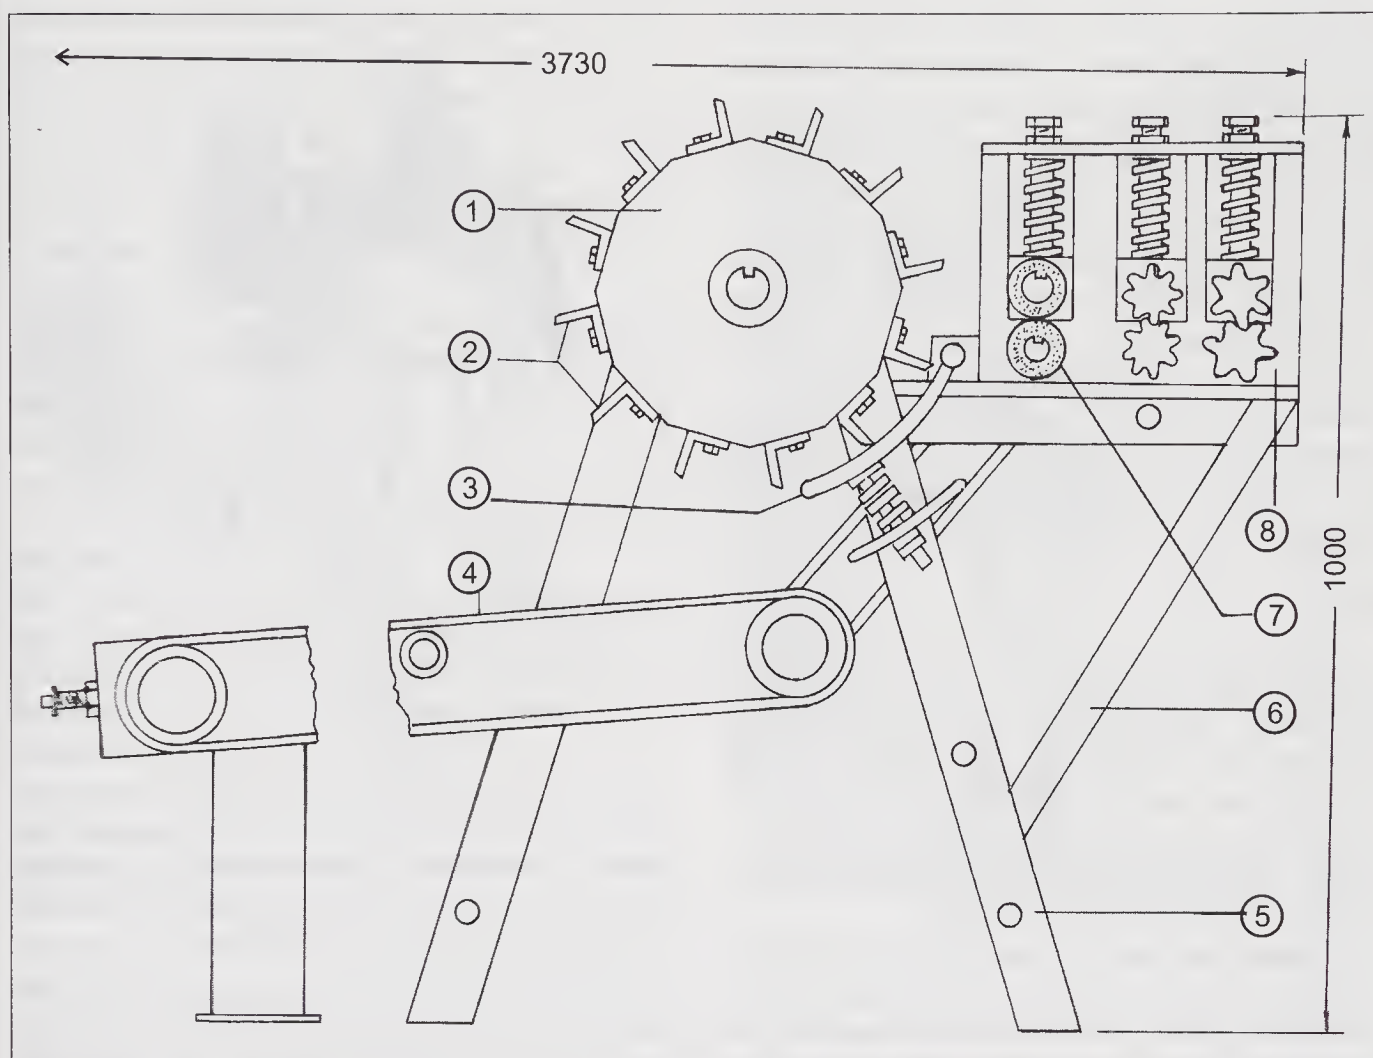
JARI Jute fibre extractor. 1, Scraper drum; 2, Blade; 3, Counter blade assembly; 4, Delivery conveyor; 5, Frame; 6, Brace; 7, Rubber roller; 8, Breaker unit.
